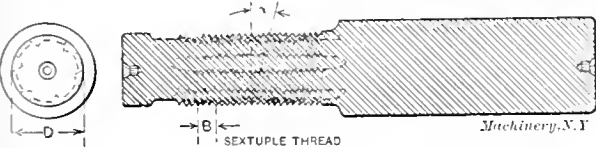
Hob used for Cutting Concave Knurls in the Milling Machine
